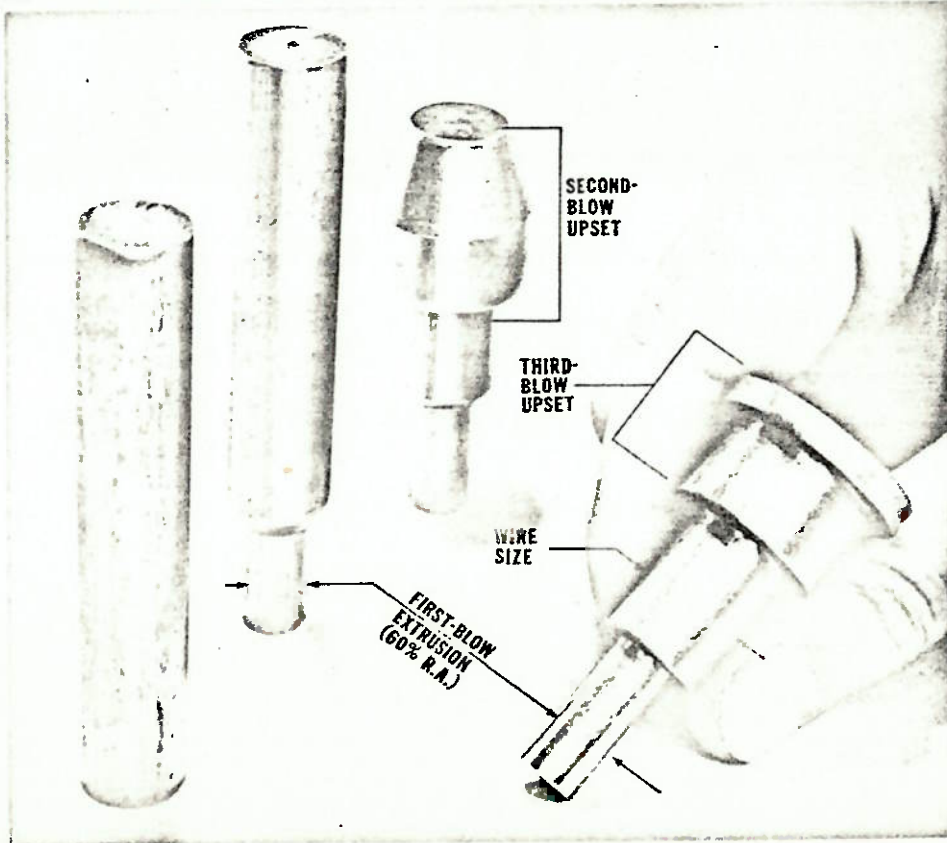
Typical part produced by combining extruding and upsetting on a multiple die forming machine. Extruding reduces the diameter of the initial stock while increasing its length and upsetting increases diameter and decreases length.
